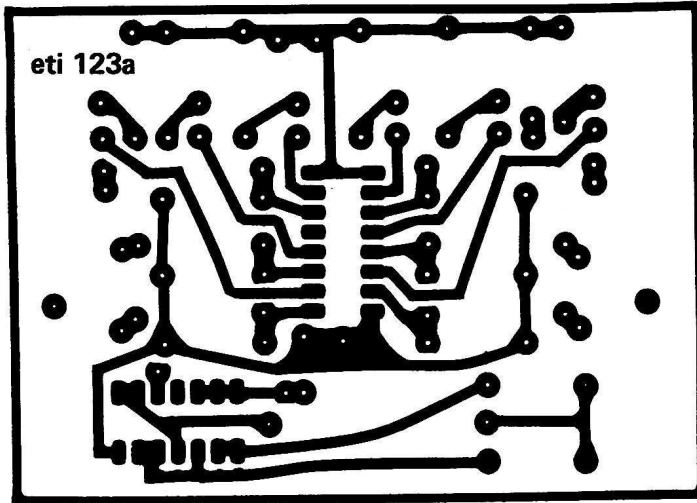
Printed-circuit board layout – ETI 123a. Full size 88 x 63 mm. Fig. 7. Printed-circuit board layout – ETI 123b. Full size 88 x 71 mm.
